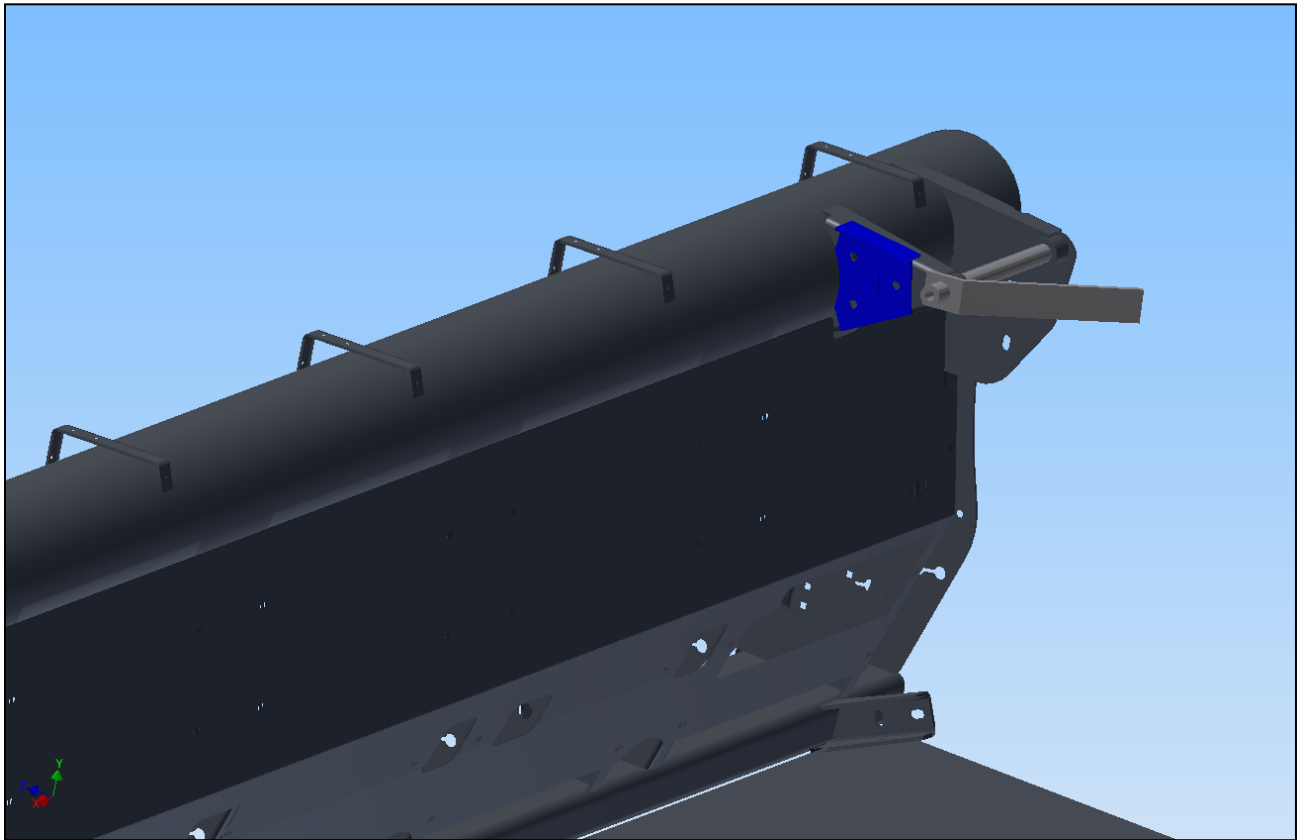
TEMPLATE ON LEFT HAND MOUNT READY TO DRILL
